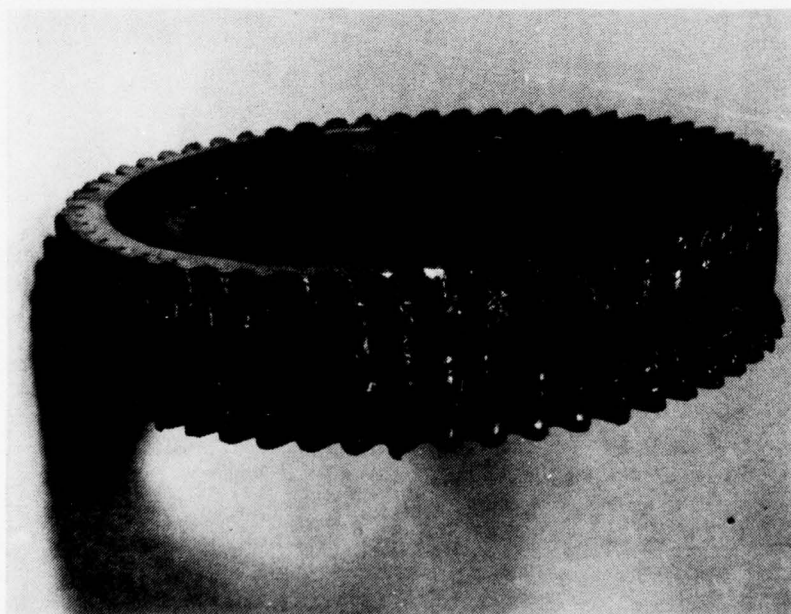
Lower planetary sun gear after 19-minute loss-of-lube test of transmission number 2.
